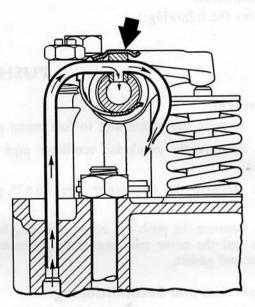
Section showing the rocker shaft oil pipe. Oil flow to shaft and rockers (indicated by small arrows) is controlled, as only a portion of the oil in the pipe flows down the peg into the shaft. The large arrow indicates the clip engaged with the shaft and the top of the peg
